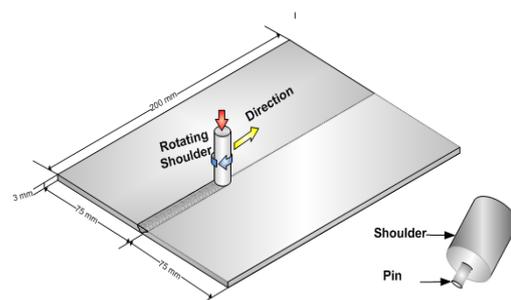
Schematic of friction stir welding (FSW) for plates
